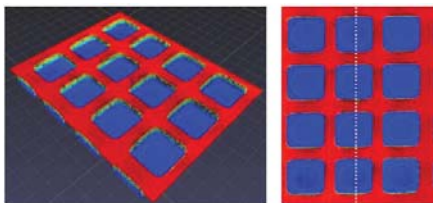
The unfilled solder paste groove image surface reconstruction image.
